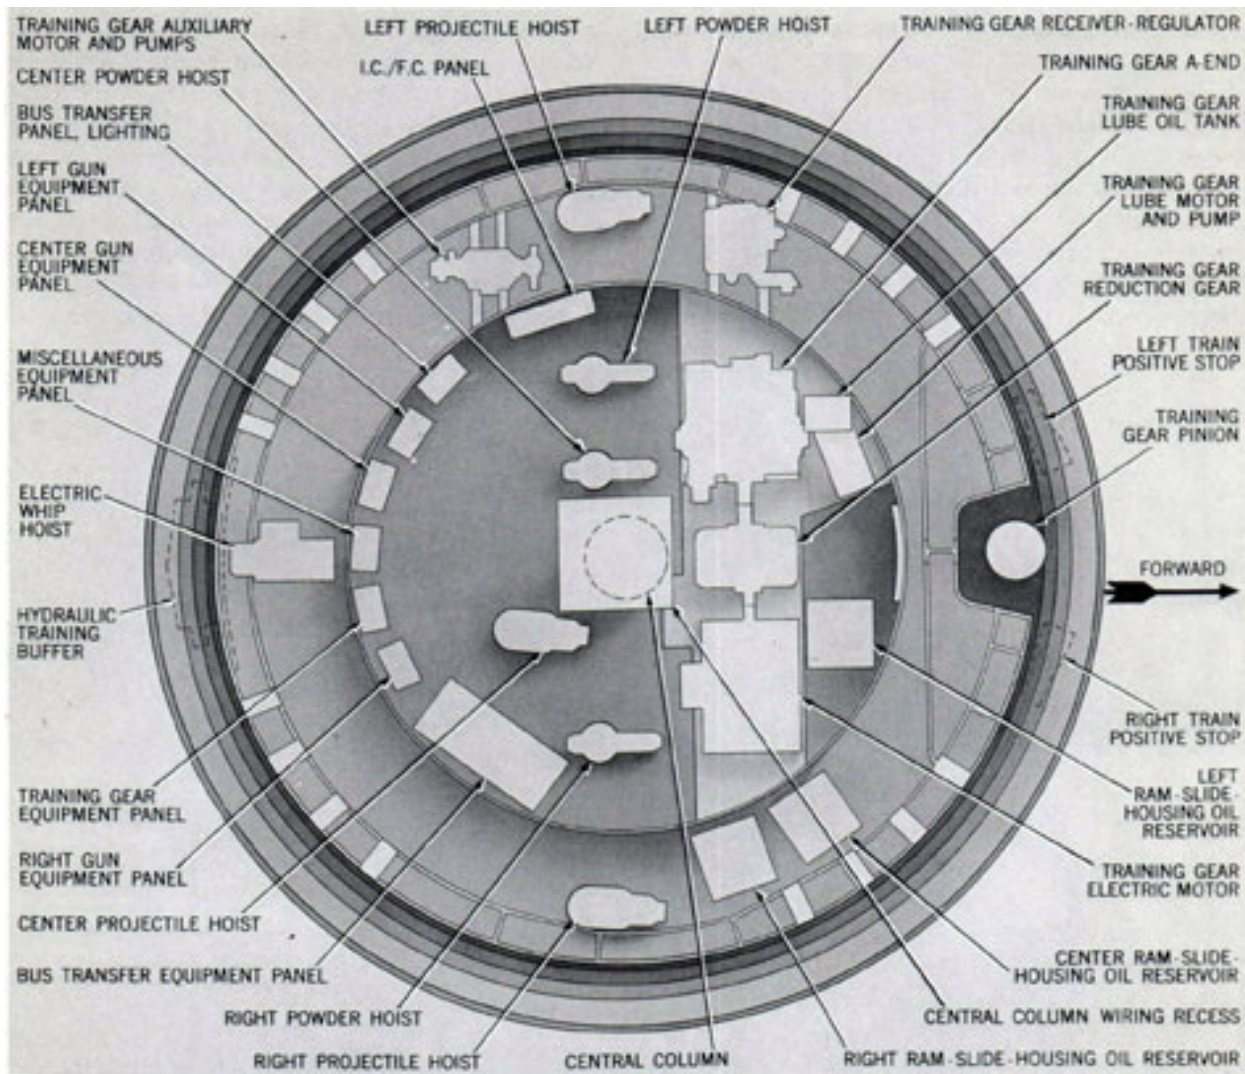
Ordnance Equipment Above Upper Projectile Flat. General Arrangement. Plan View
